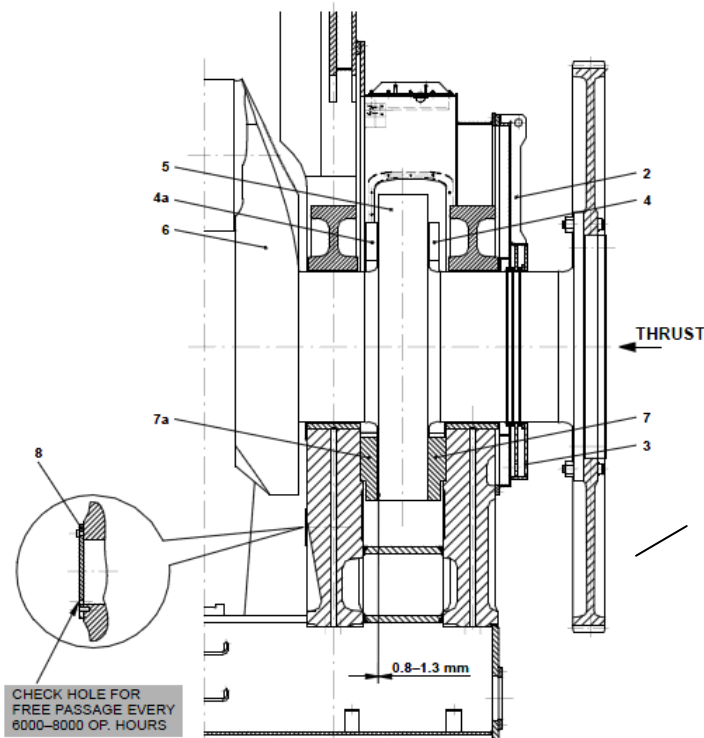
Thrust bearing of Sulzer RT-flex diesel engine:
